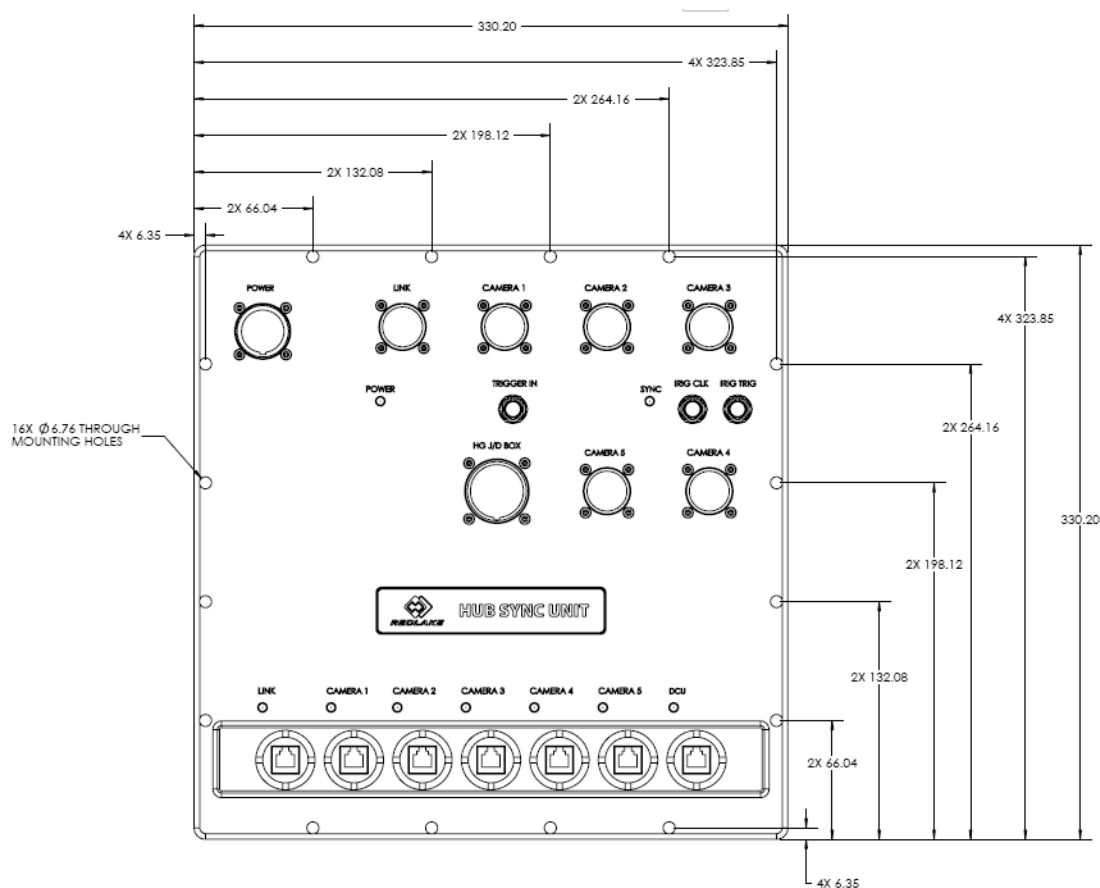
Hub Sync Unit (HSU) mounting dimensions, front (in mm)
